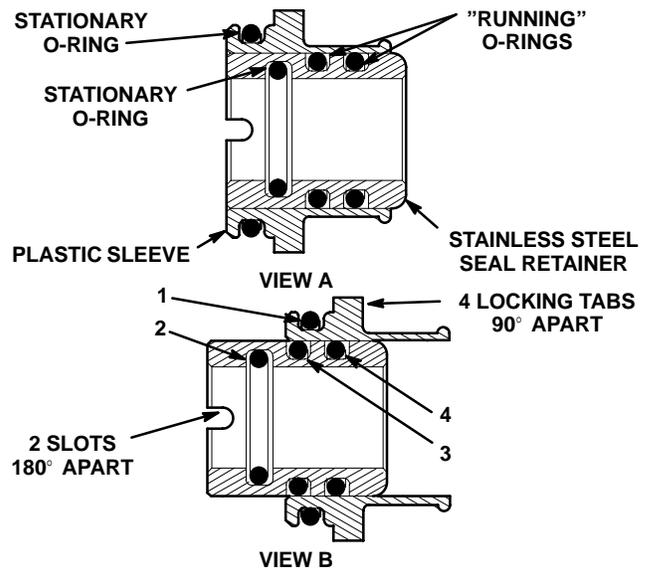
SERVICING BEATER DRIVE SHAFT SEAL ASSEMBLY
